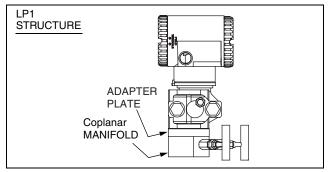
LP1 Shown Mounted to a Coplanar Manifold using an Optional Intermediate Adapter Plate
